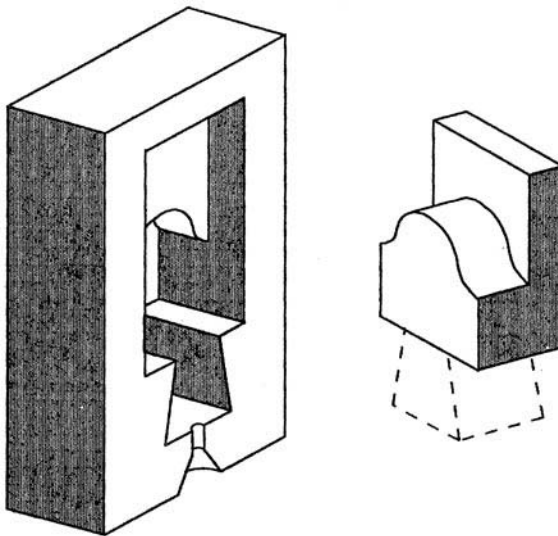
Single-cavity mold for investment casting patterns.
